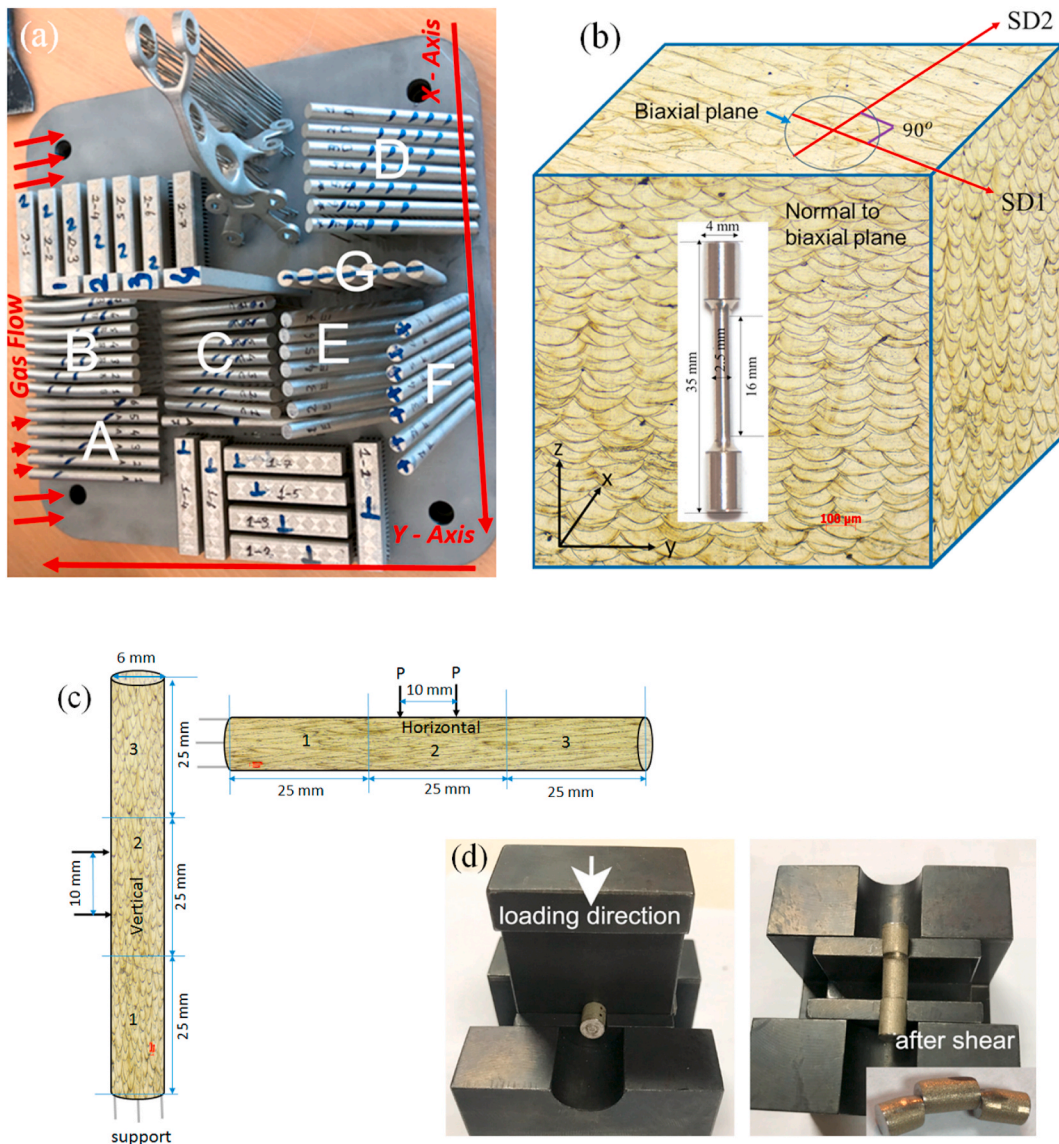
The pictures (a) SLM-fabricated bars after cleaning, (b) the axis dependent microstructure of fabricated specimens and a 0° inclined tensile test specimen and (c) shear test specimens and (d) double shear test fixture and deformed specimen.
